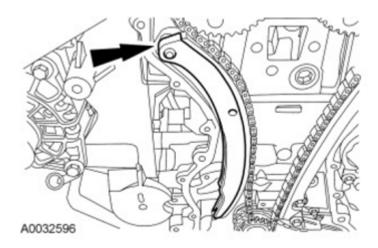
Locating Timing Chain Tensioner Arm Courtesy of FORD MOTOR CO.
